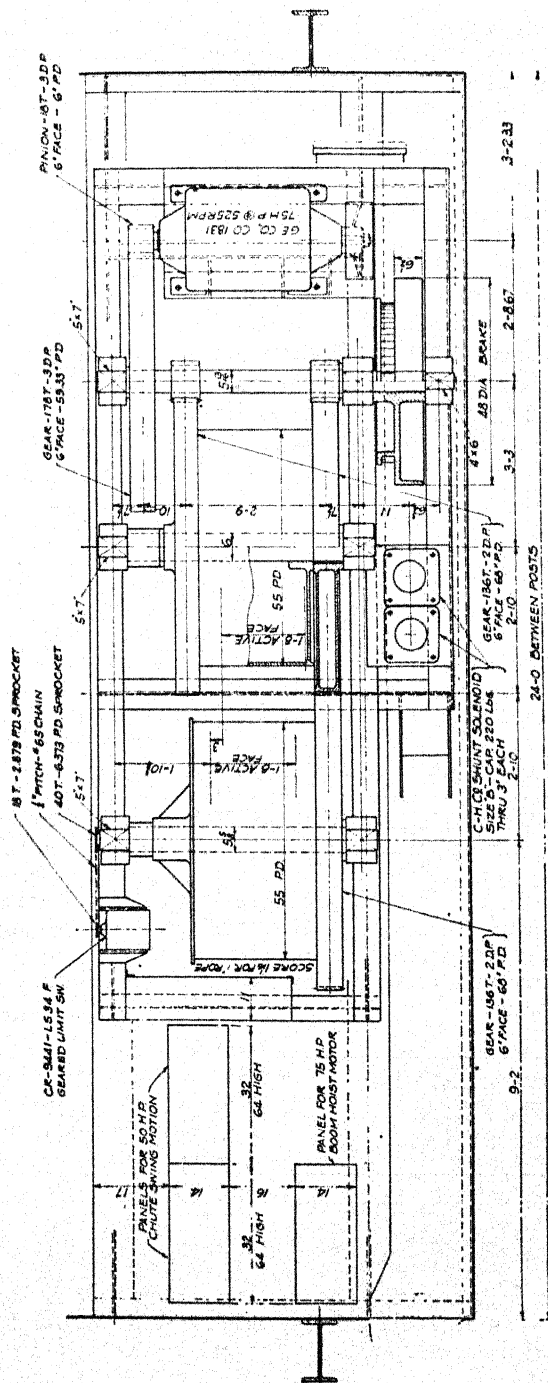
The designer's study of a welded boom-hoist mechanism.
